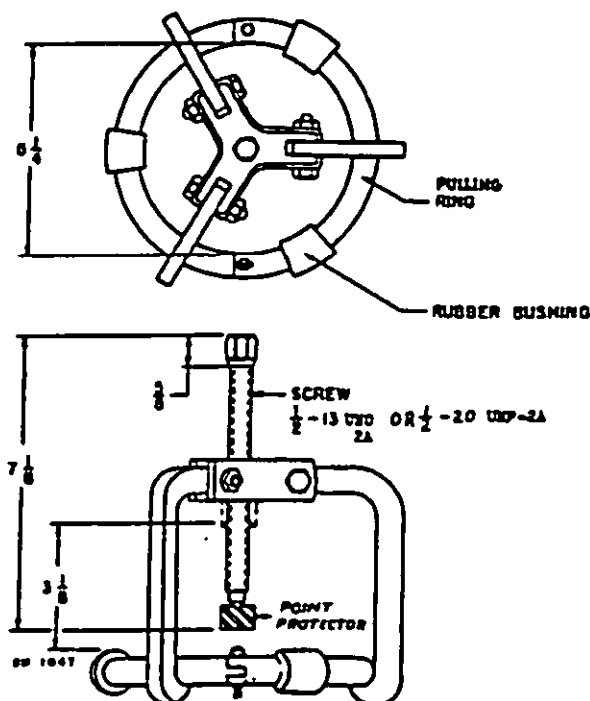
Type VI, puller, mechanical, ring type steering-wheel, three-arm.
